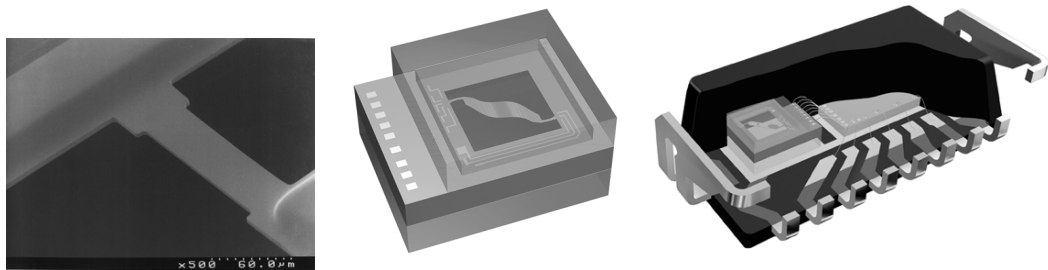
The silicon micromachined resonator beam, the chip set and exploded view of the assembled transfer moulded packaged SA30 Crash Sensor.
